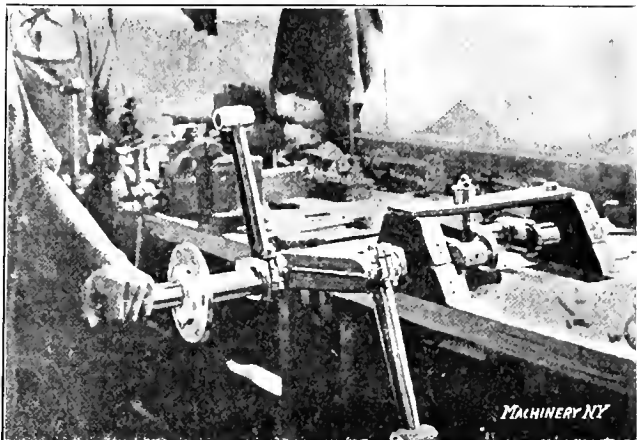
Bench Clamps for Holding Cranks while Fitting the Connecting-rods
